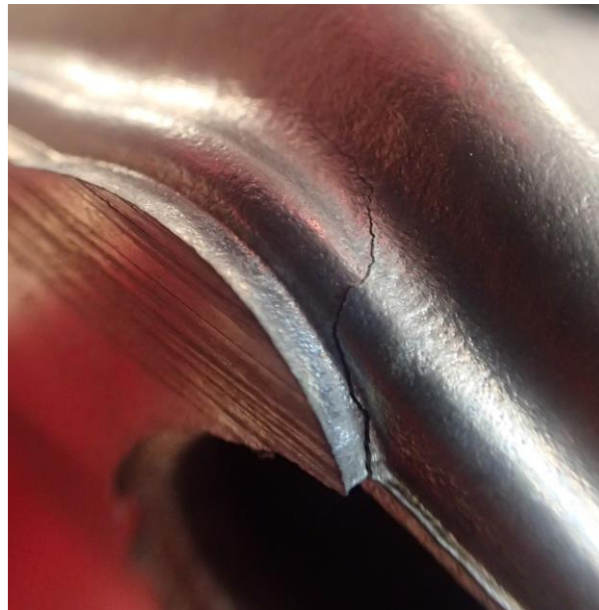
Picture of the cold crack in the casting of the type 2.
